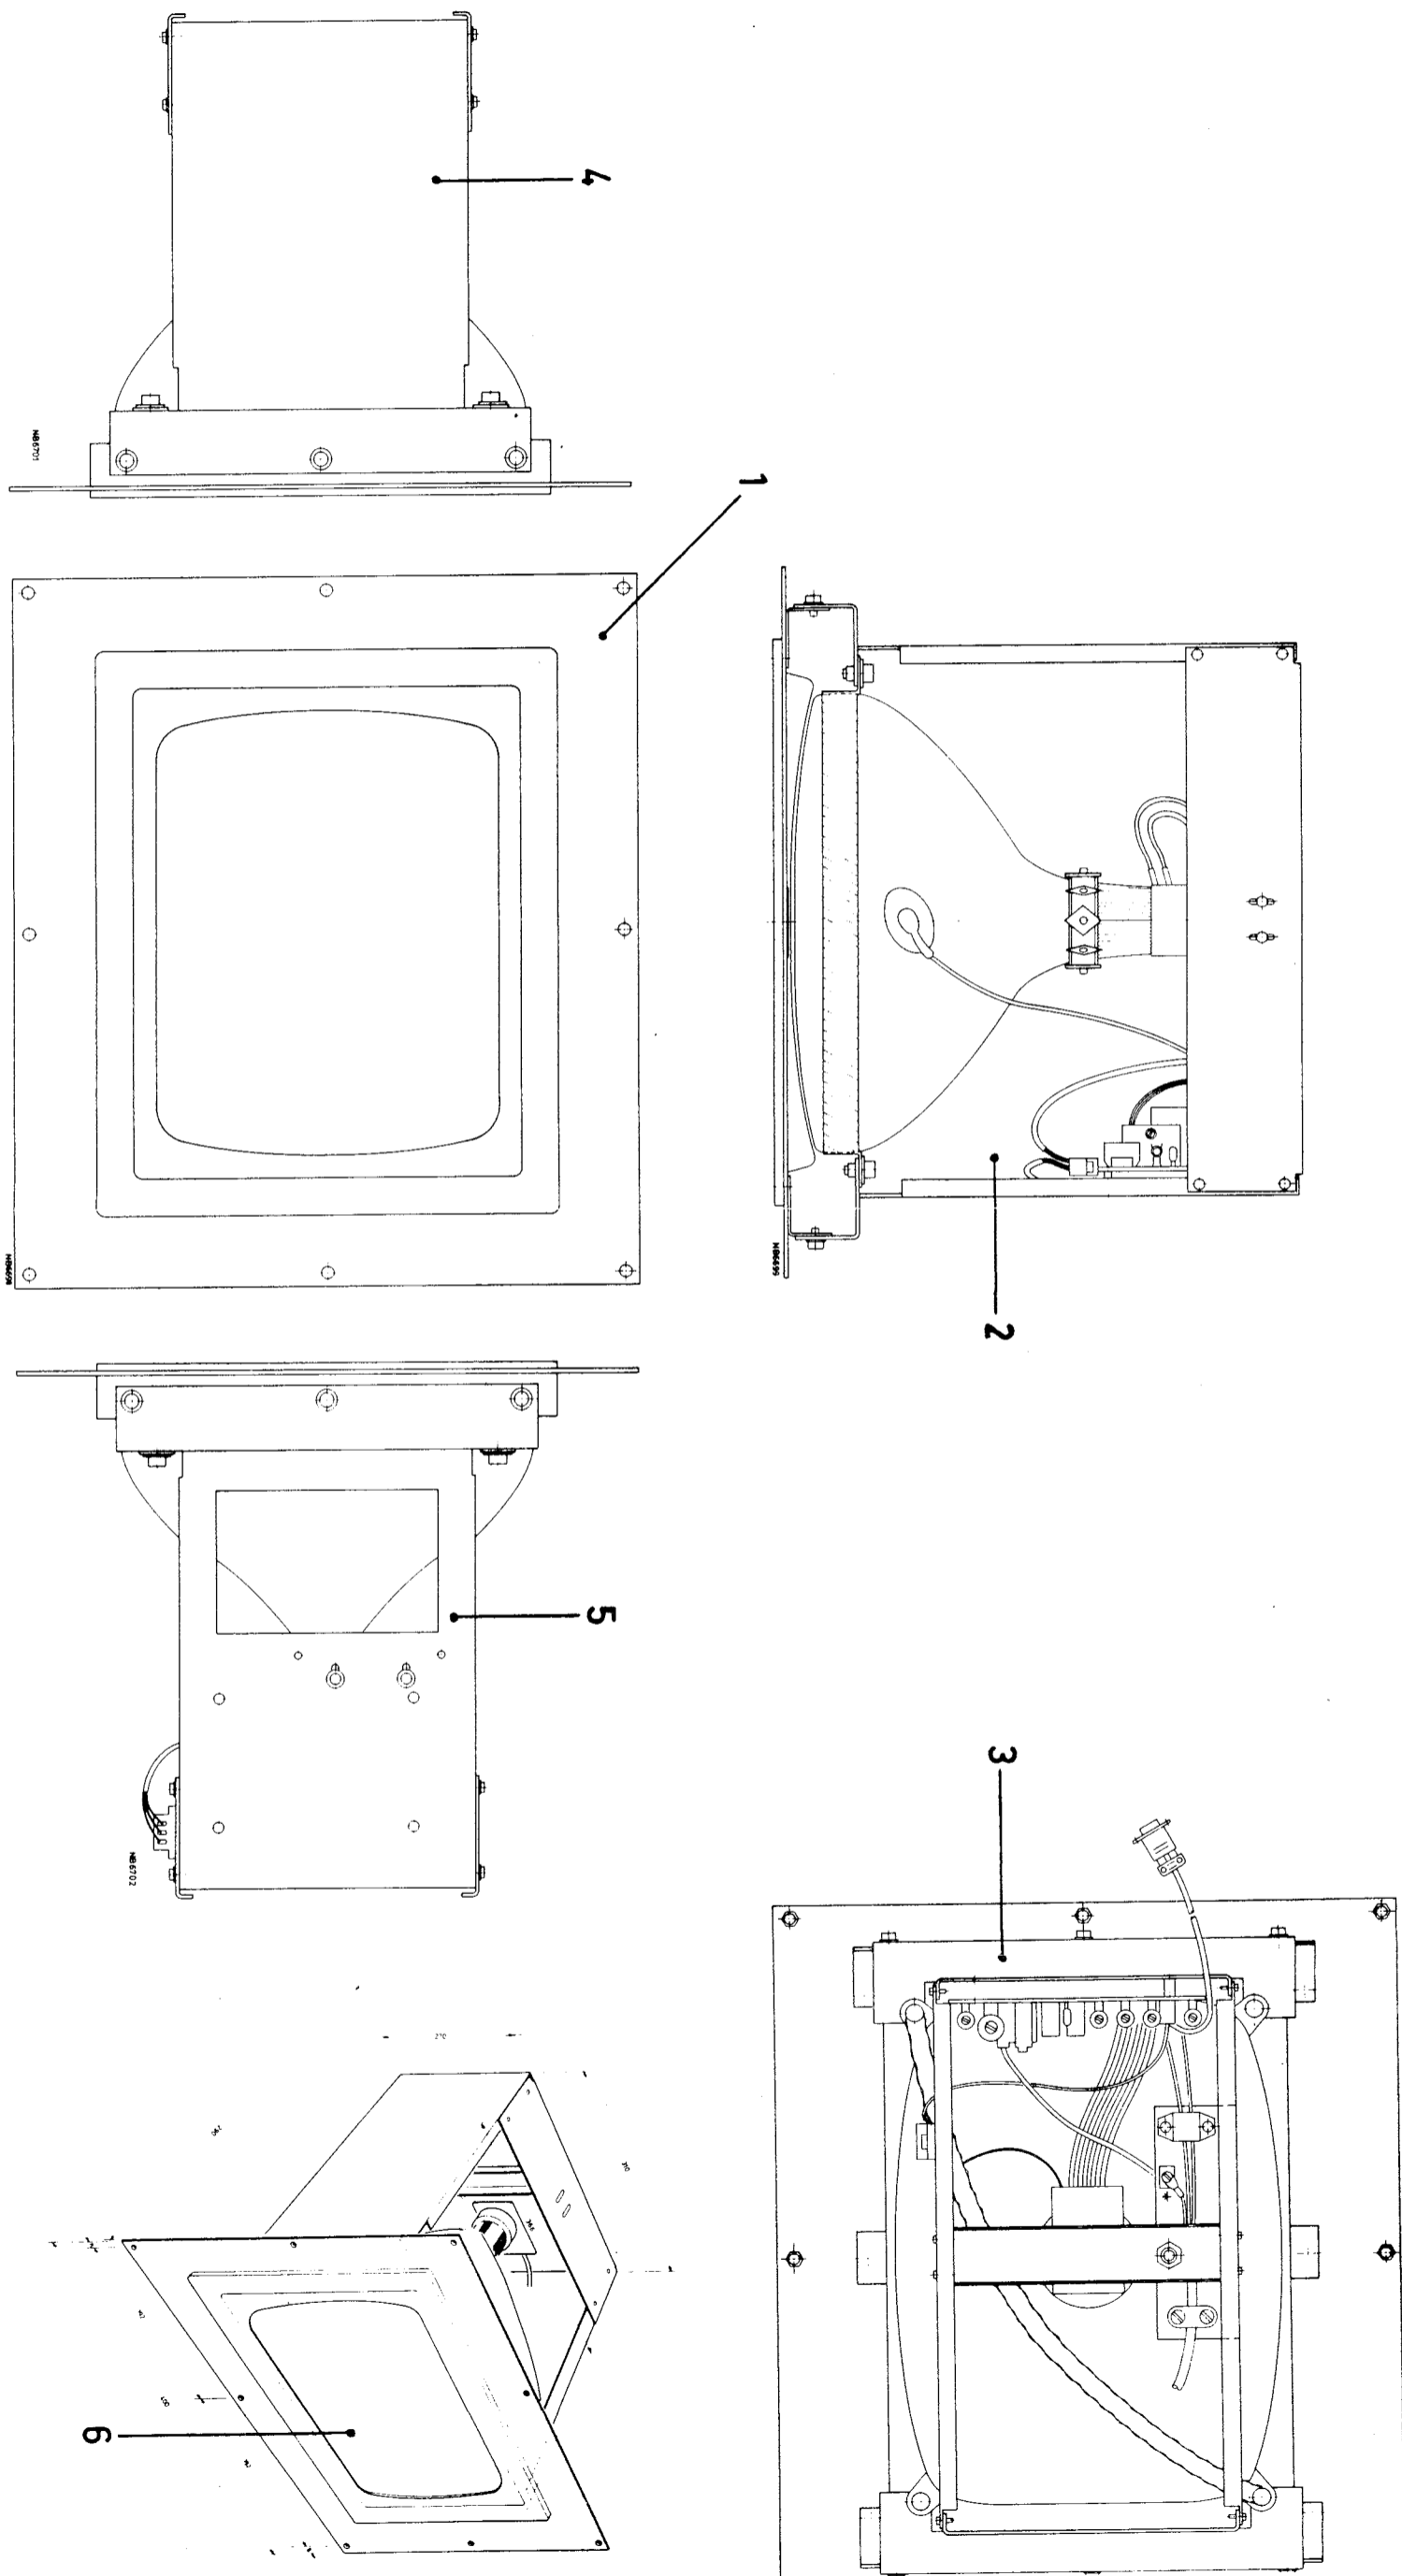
6 Mounting dimensions of 14" colour monitor
